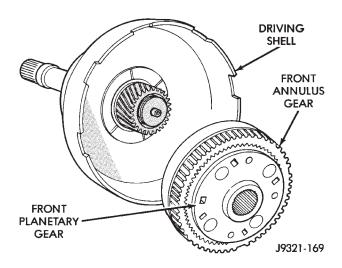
Removing Front Planetary And Annulus Gears—46RH
